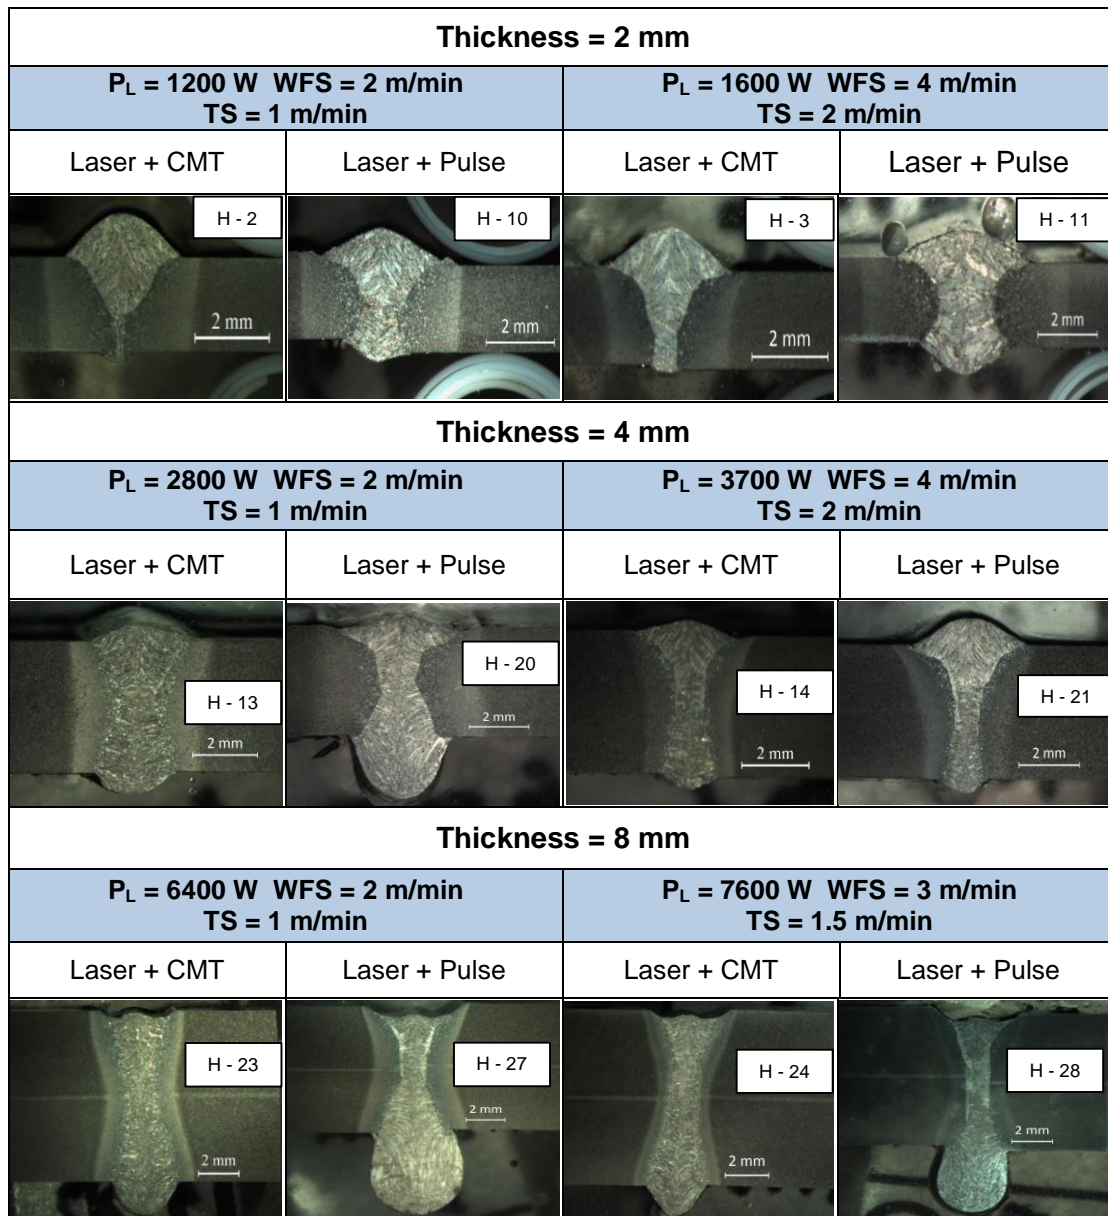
Macrographs of joints welded by combination of laser with CMT standard mode and laser with pulse mode
